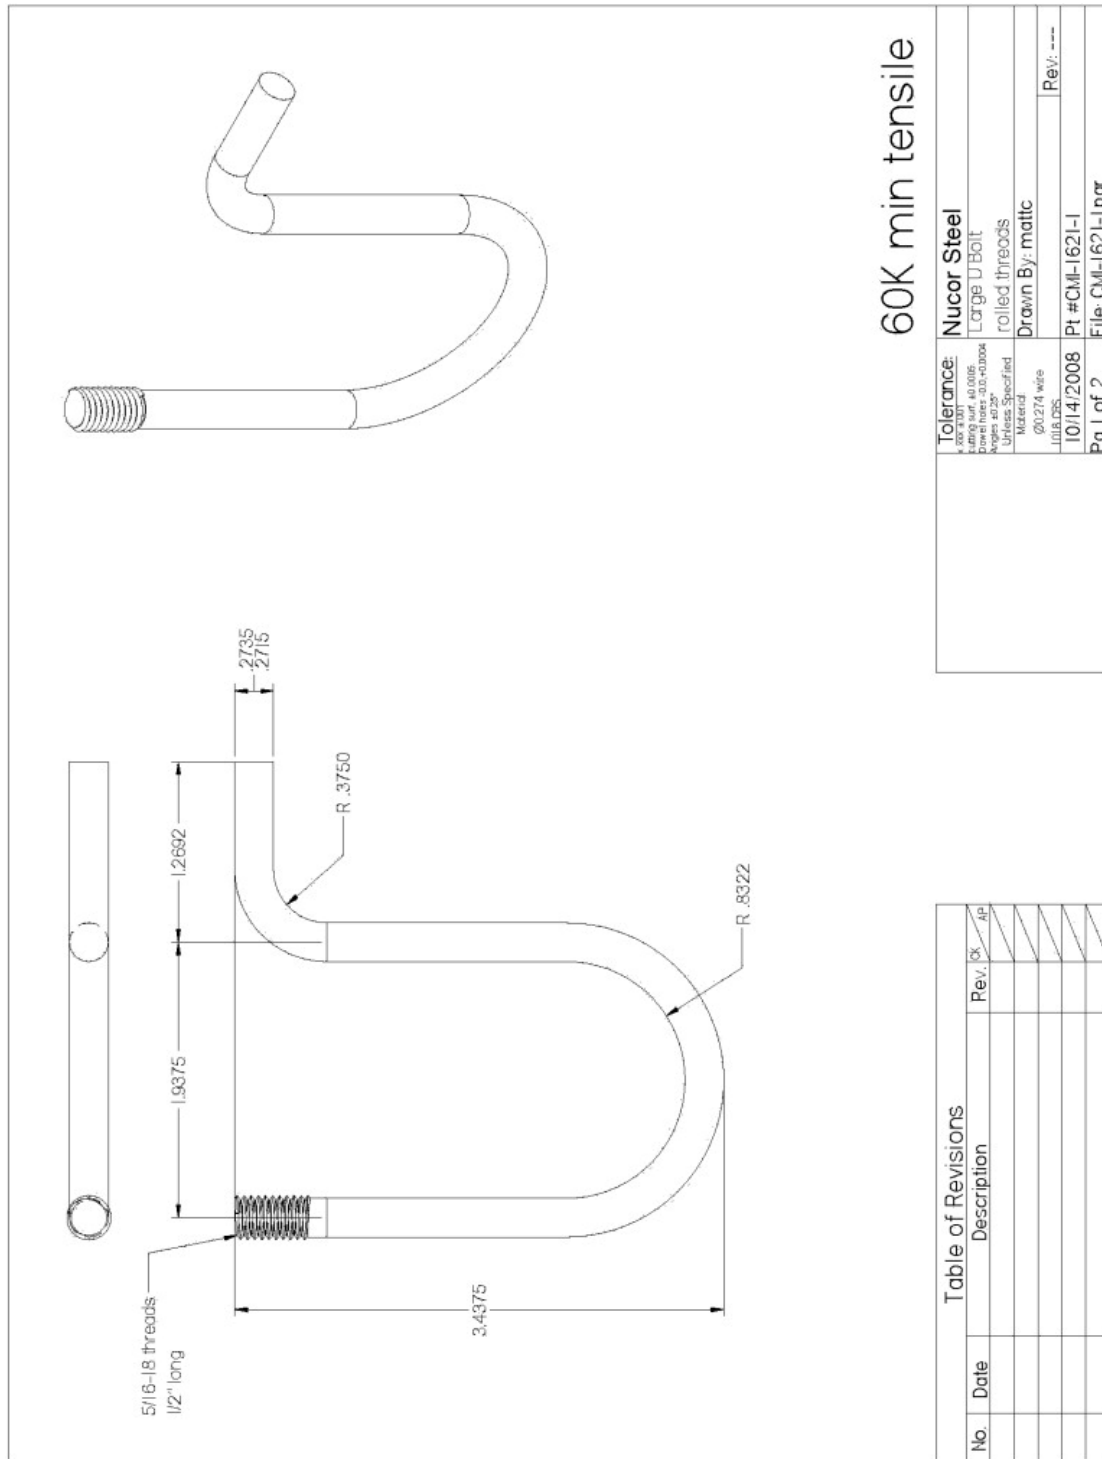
Nucor Cable Barrier Long Clip Design Details [30]
